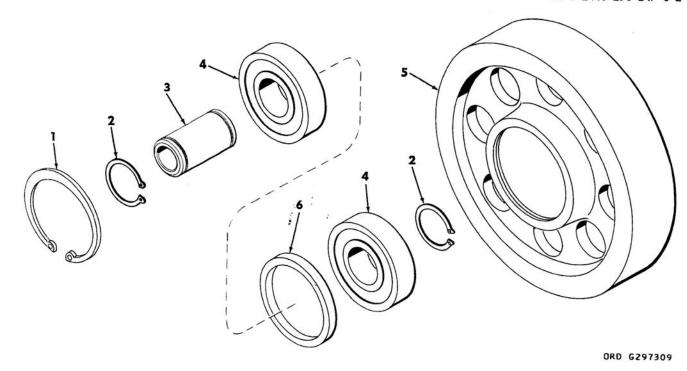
WHEEL ASSEMBLY /8167416/ /SEE FIGURE 8 FOR NEXT HIGHER ASSEMBLY/
